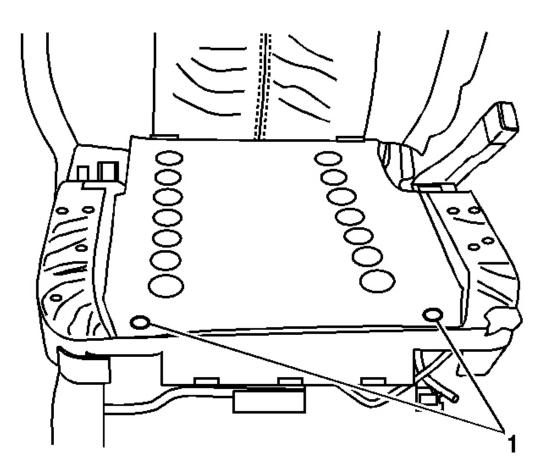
Identifying Seat Cushion Frame Bladder Retainers Courtesy of GENERAL MOTORS CORP.
